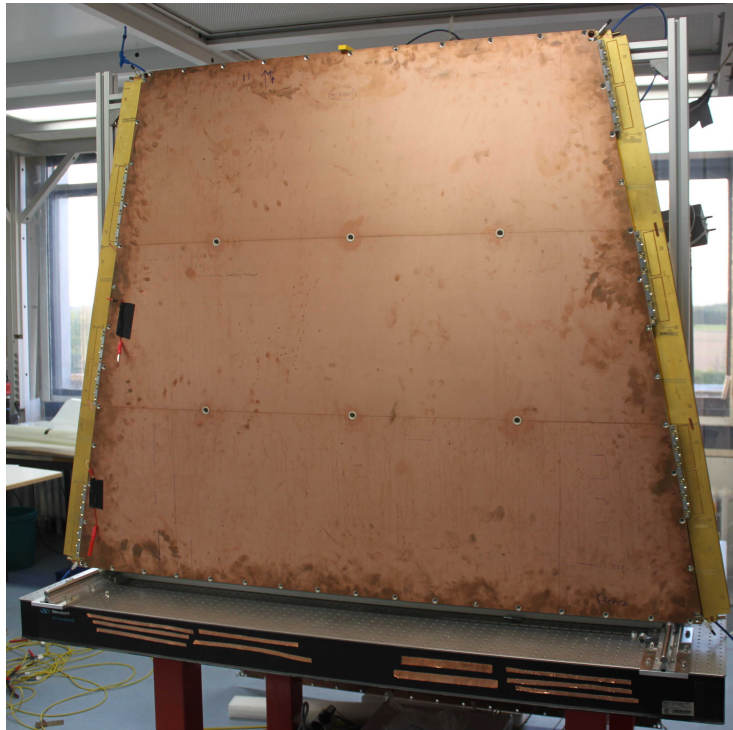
Photo of the SM2 quadruplet assembly. An assembly frame is mounted on a table. The formerly mentioned spacers on the lower side of the readout panels are guided by two rails.
